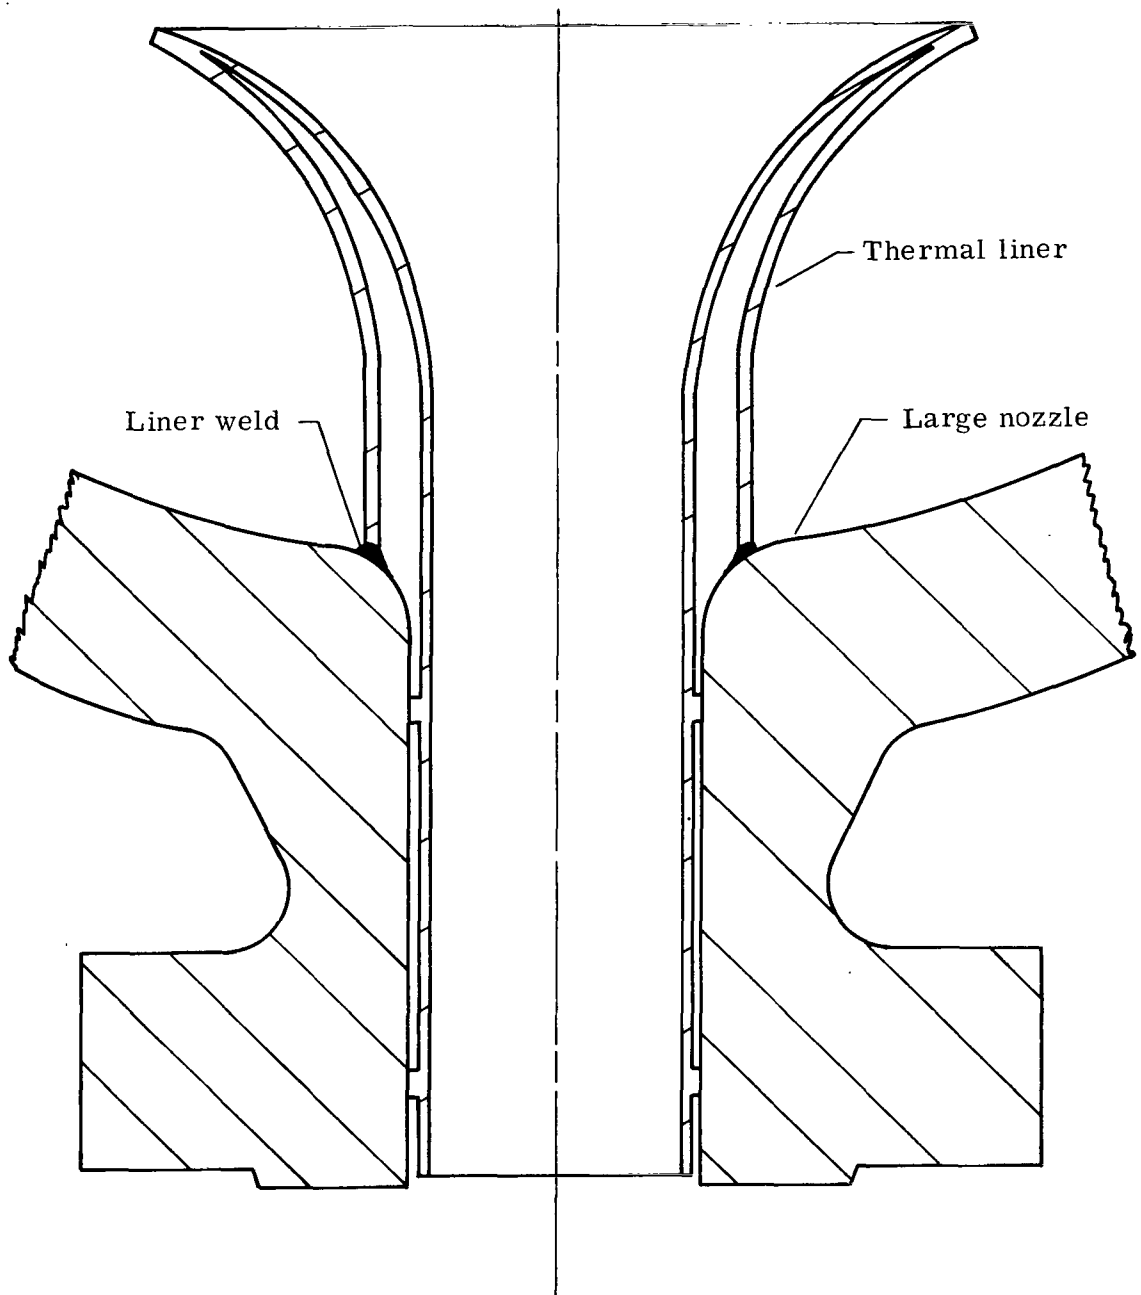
Cross-sectional view of air-storage-vessel nozzles prior to modification.
